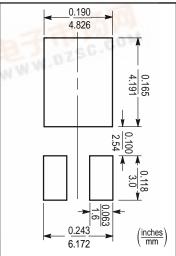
Minimum Pad Sizes for Surface Mounting
